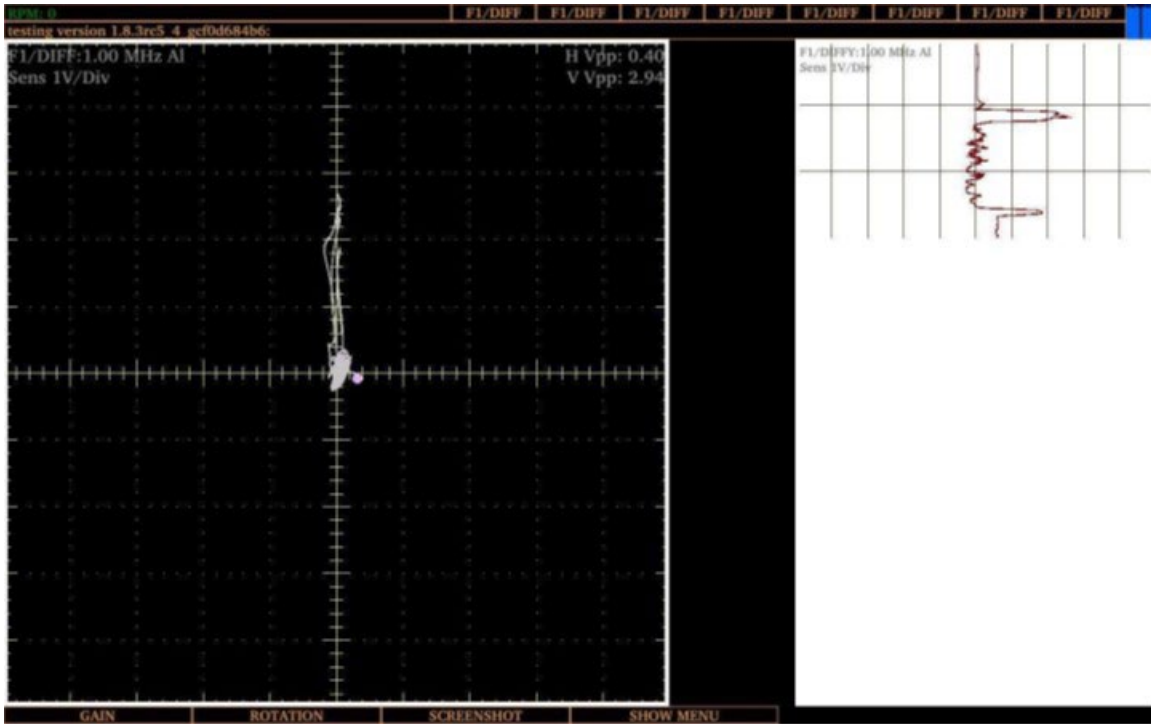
ET indication of defects at Location A and B in fillet weld test panel TTCL-P2
